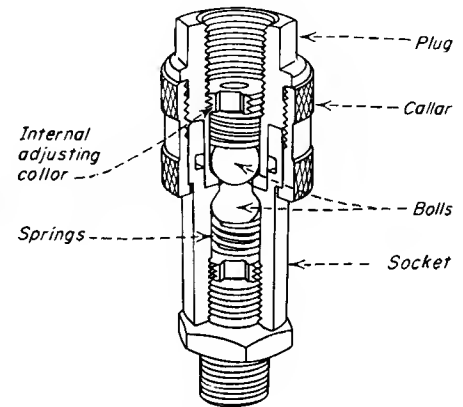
High pressure hydraulic coupler. Threaded collar pulls the socket and plug together forcing the steel balls off their seats. On disconnecting, spring force reseats the balls. Internal collar permits increasing or decreasing of the spring force to perfectly center the ball checks. Unit is recommended for pressures up to 10,000 psi; flow up to five gallons per min. *Pioneer Hydraulics, Inc.
